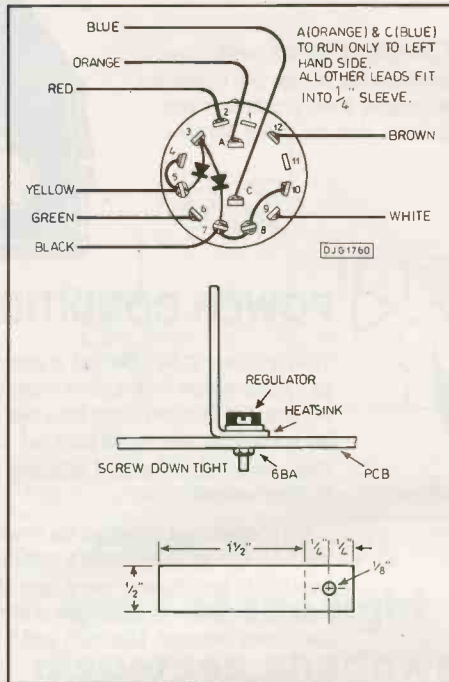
Switch wiring details, and heatsink construction and mounting for regulator.
